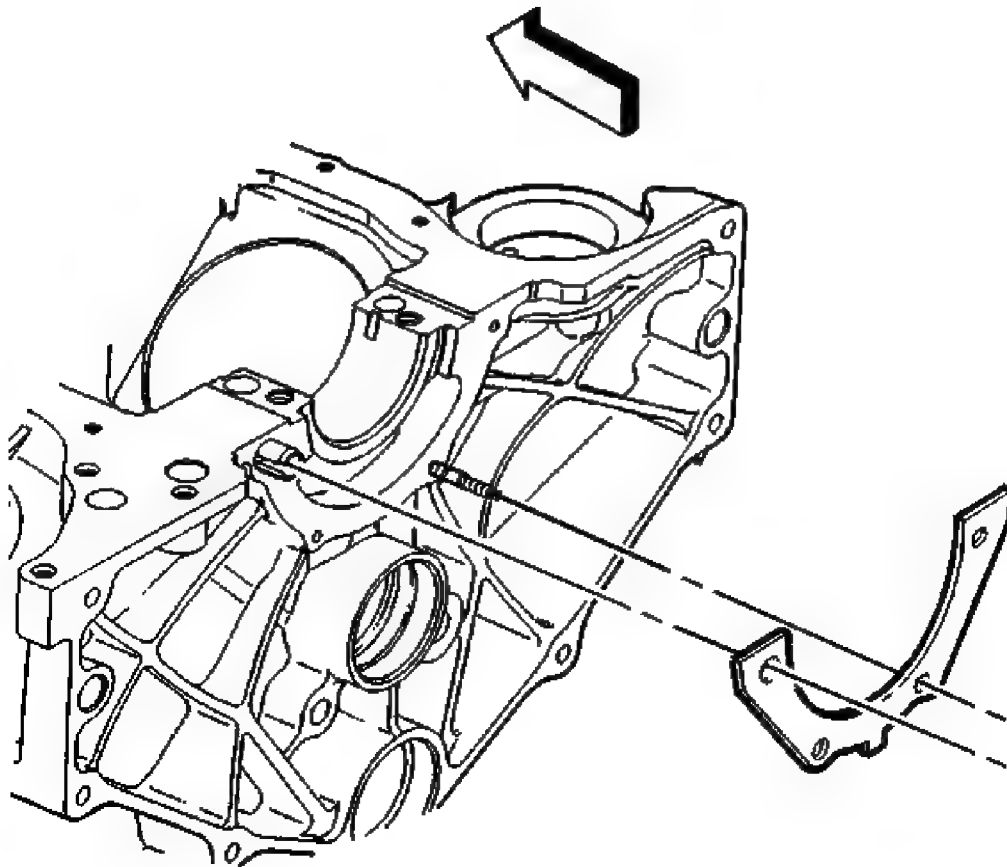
Locating Crankshaft Rear Oil Seal Housing Gasket
